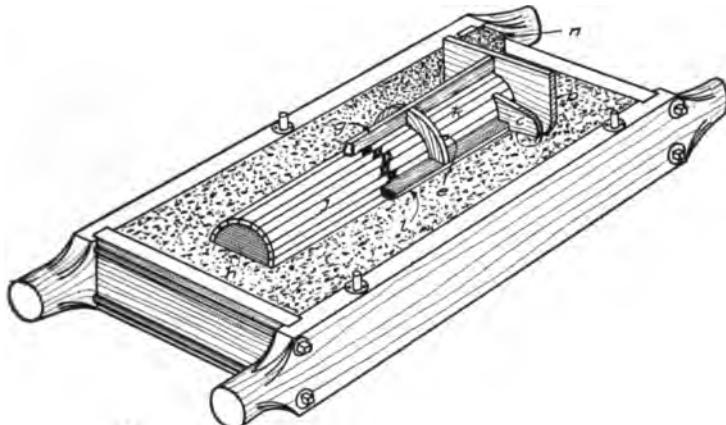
Pattern Assembled on False Cope Ready for Ramming Cope Mold
